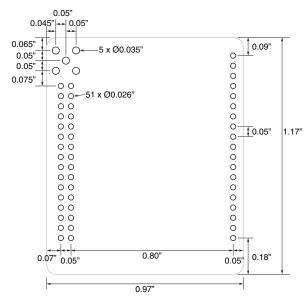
EVM-fff-PRC PCB Layout Dimensions
